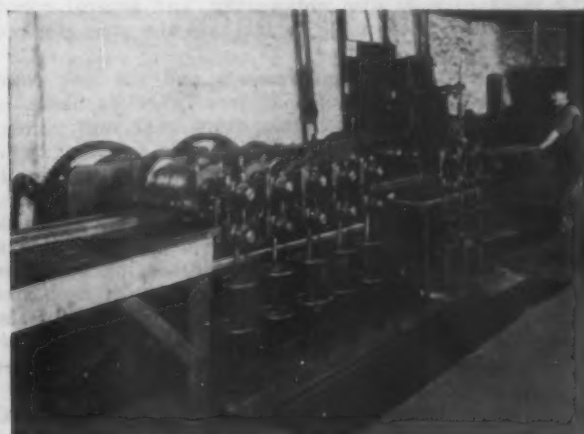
Cold Roll Forming Machines Arranged in Tandem for Production of Steel Door Casings Shown in the Foreground
